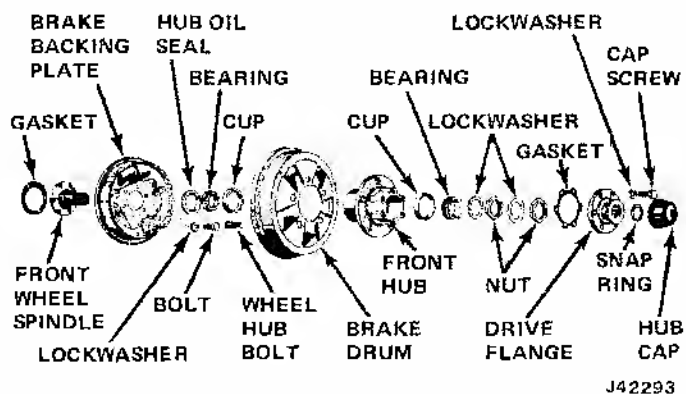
Front Wheel Attaching Parts, CJ Models
